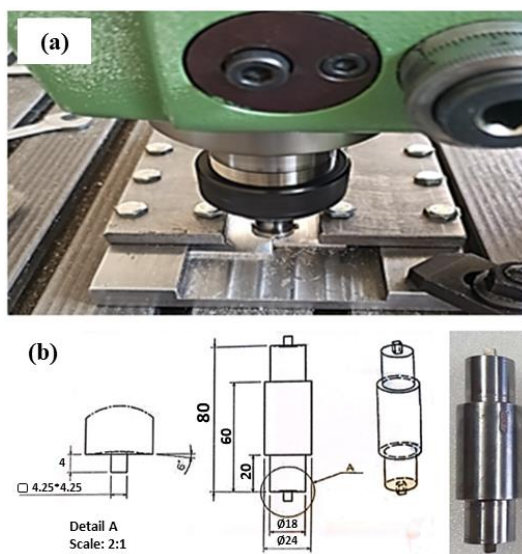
(a) Designed fixture for FSW process and (b) dimensions and shape of used tool and method of rigidly holding pieces in FSW process. (Dimensions are in mm.)
